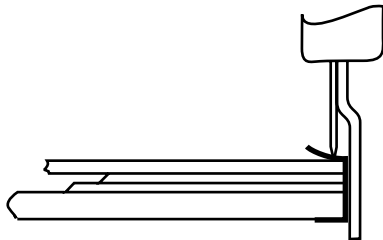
Roll the side, back, and just a little of the tape on the front of the glass. Cut through the tape about 1/16" from the edge with a dust cover trimmer.
